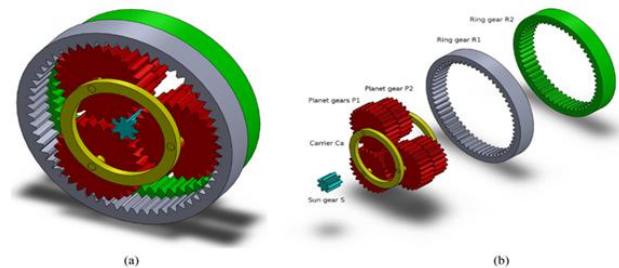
Model of a 3K compound planetary gear train: (a) Assembled model, (b) Disassembled model, [17]
